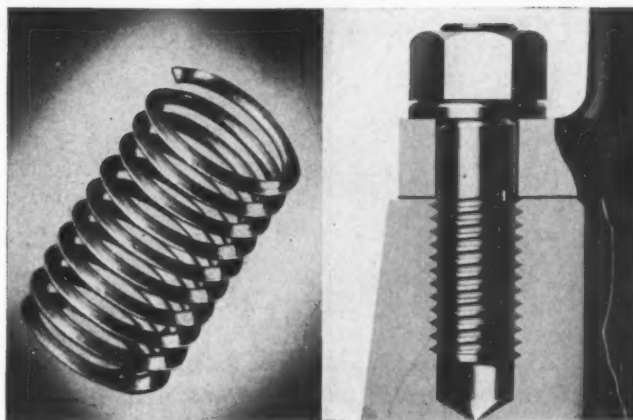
Spiral thread insert protects threads from damage in soft materials, permit control of thread tightness
